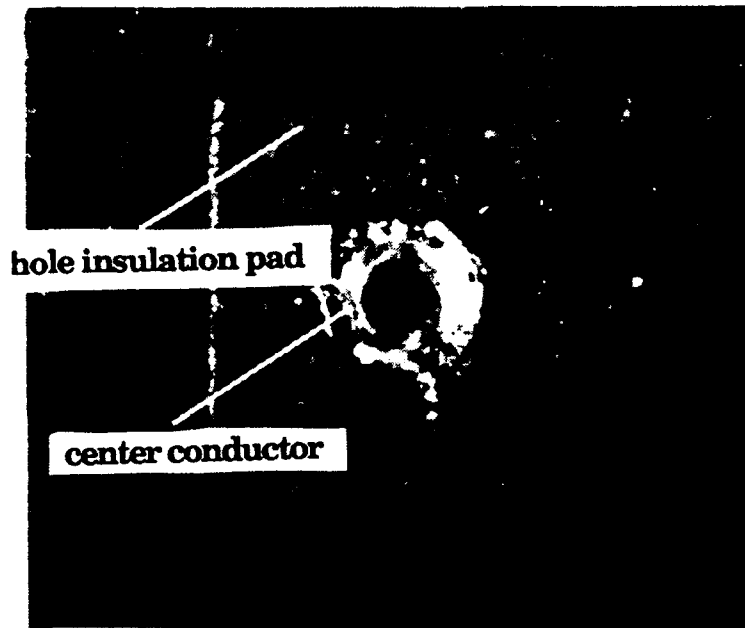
A metal core through-hole (13 mil diameter, 20 mil thick metal core) produced entirely by low cost screen printing techniques
